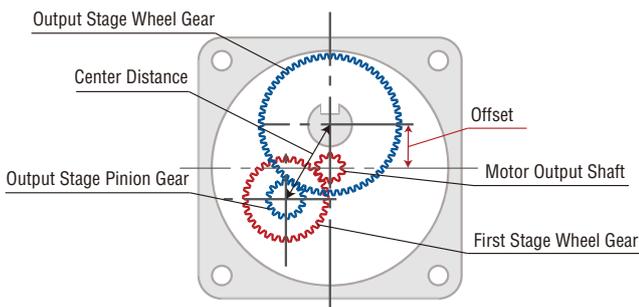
Arrangement of Gears for Parallel Shaft Gearbox (View from front side)
